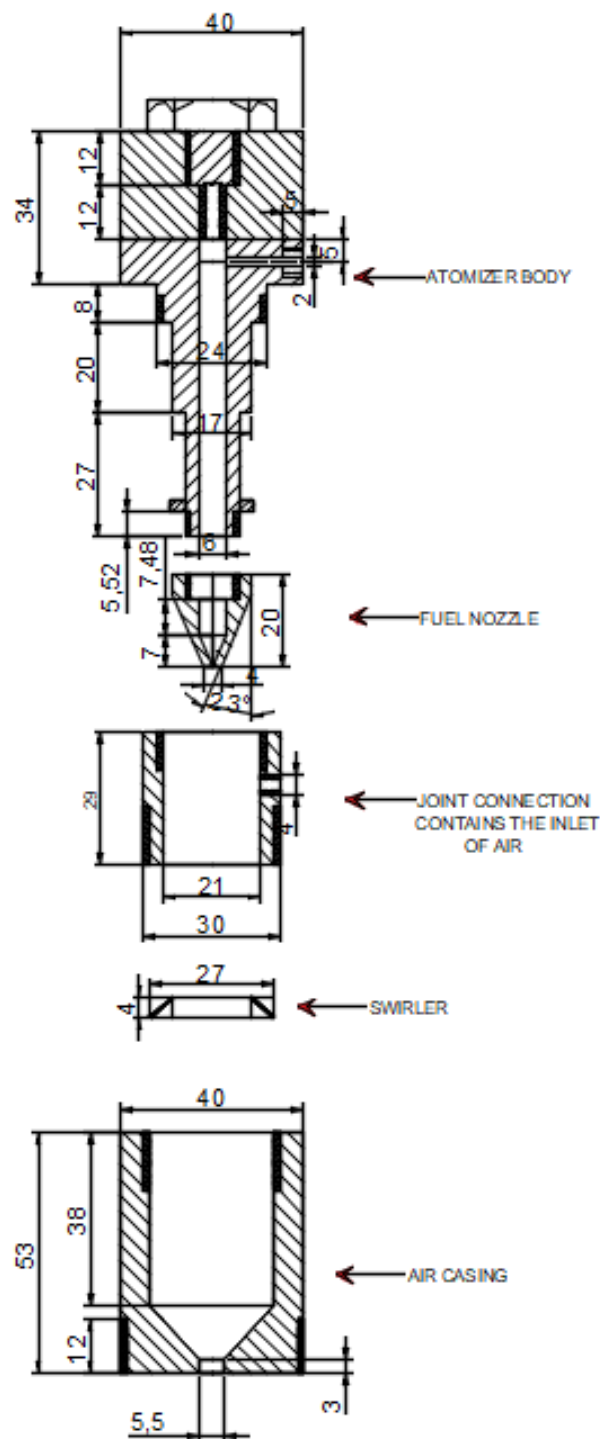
a External mixing air assist atomizer Dimensions in (mm)
